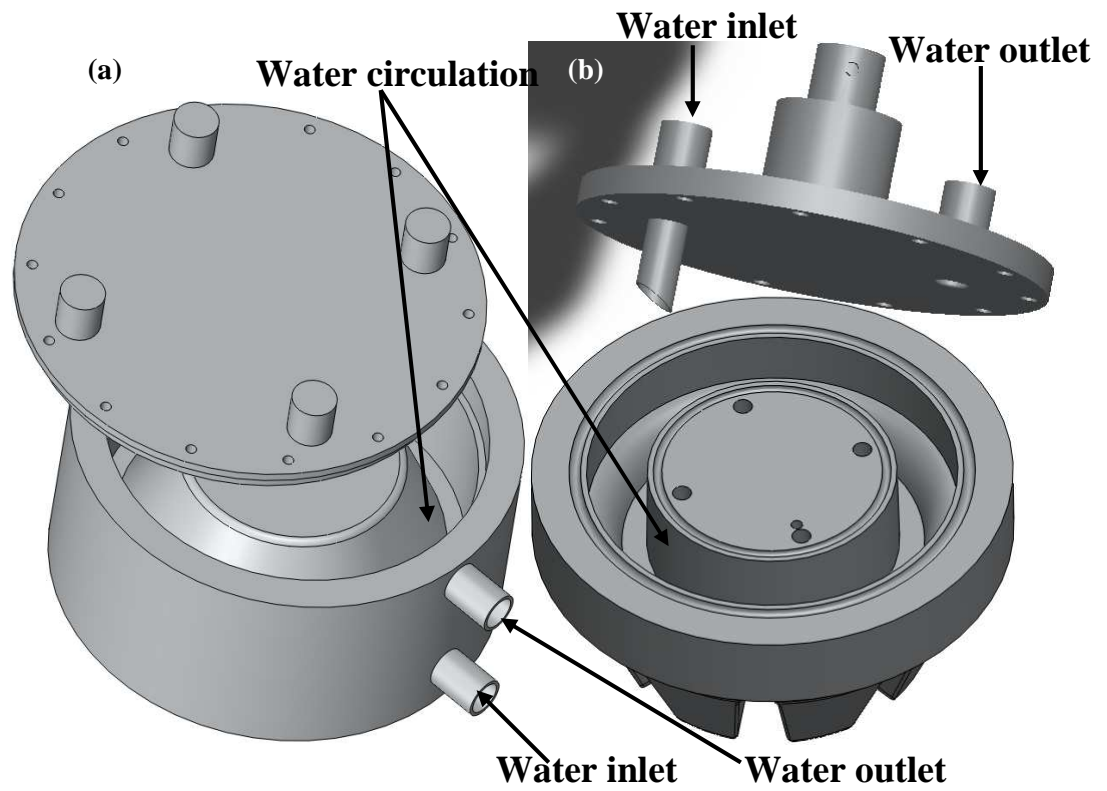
Water cooling system of (a) the male and (b) female tool
